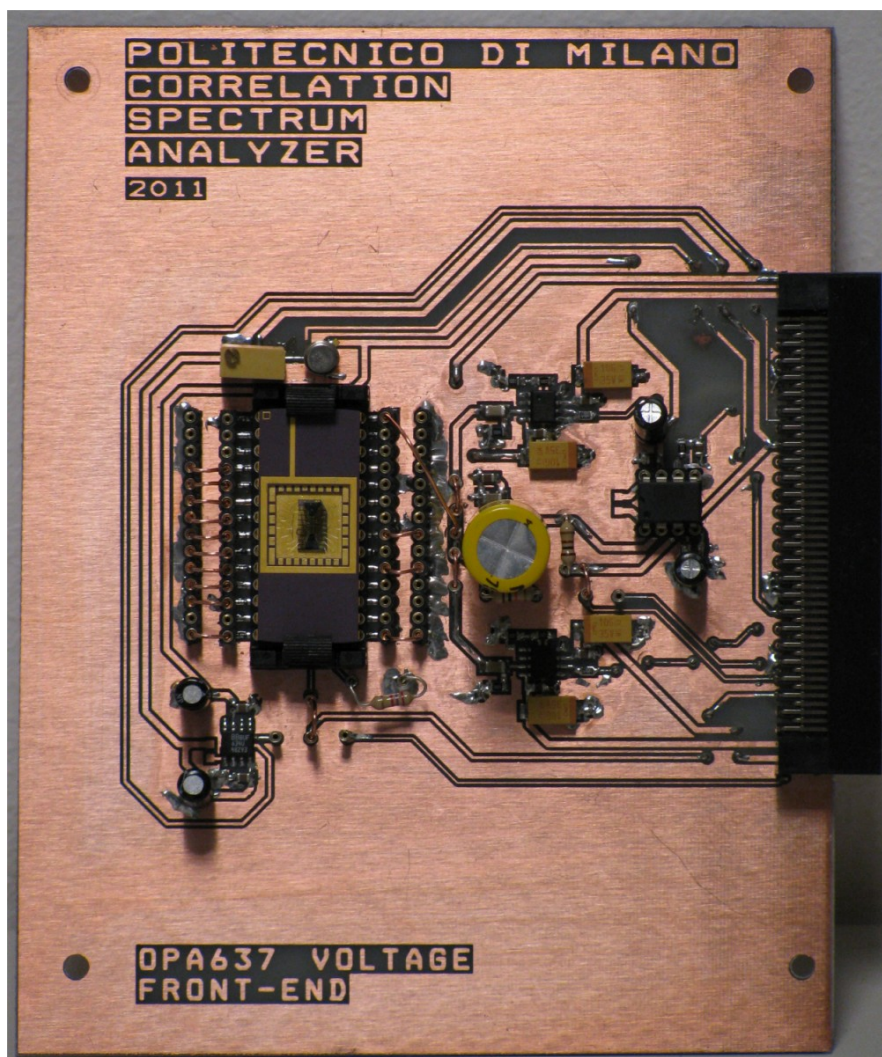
Front-end board for MTJ noise measurement viewed from the top side
